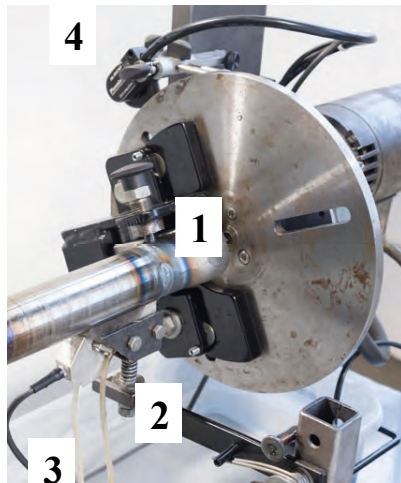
Rotating system with weld [1], probe [2], irrigation hoses [3] and encoder [4]
